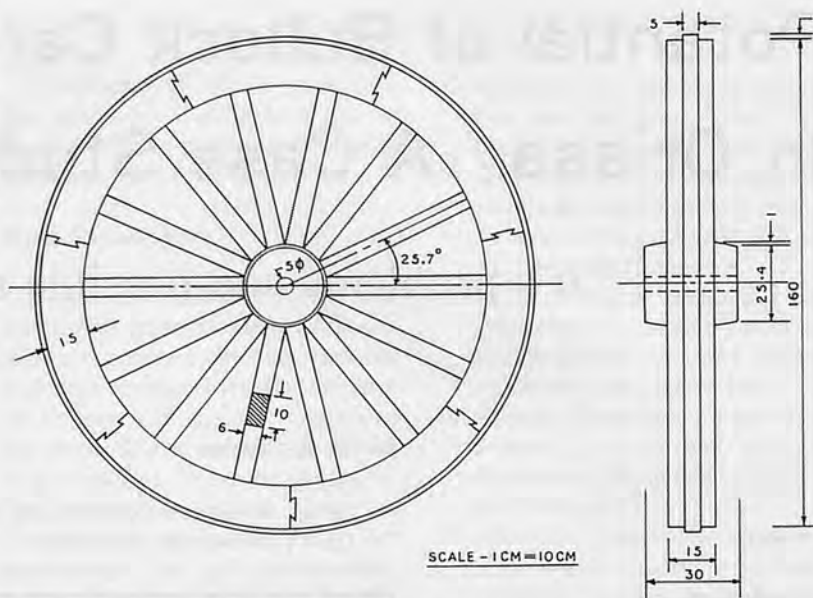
Bullock cart wheel (all dimensions are in cm)
